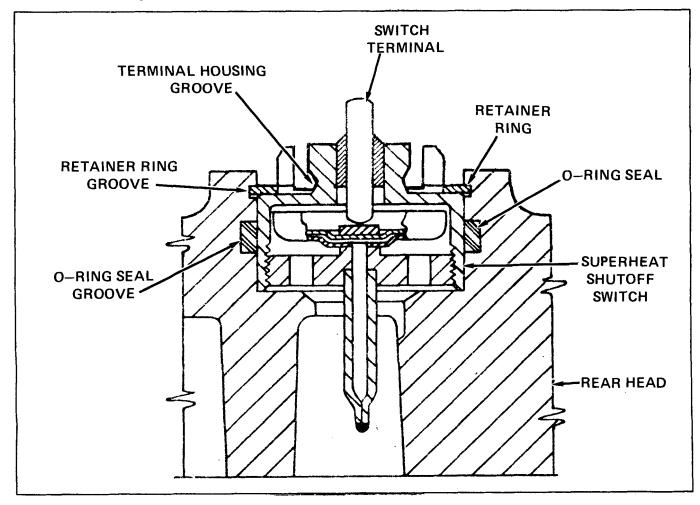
A-102A Cross Sectional View - Superheat Shut-Off Switch in Rear Head
